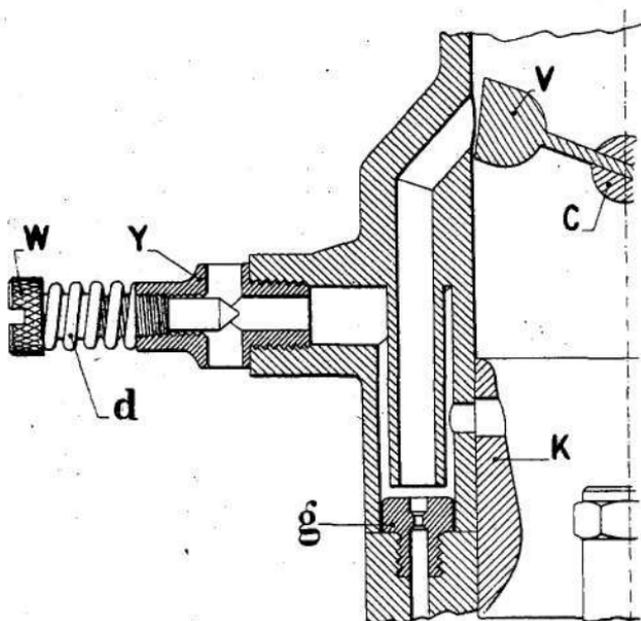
Sectional View of the MOV type in the slow running position showing the arrangement of the extra air screw.
